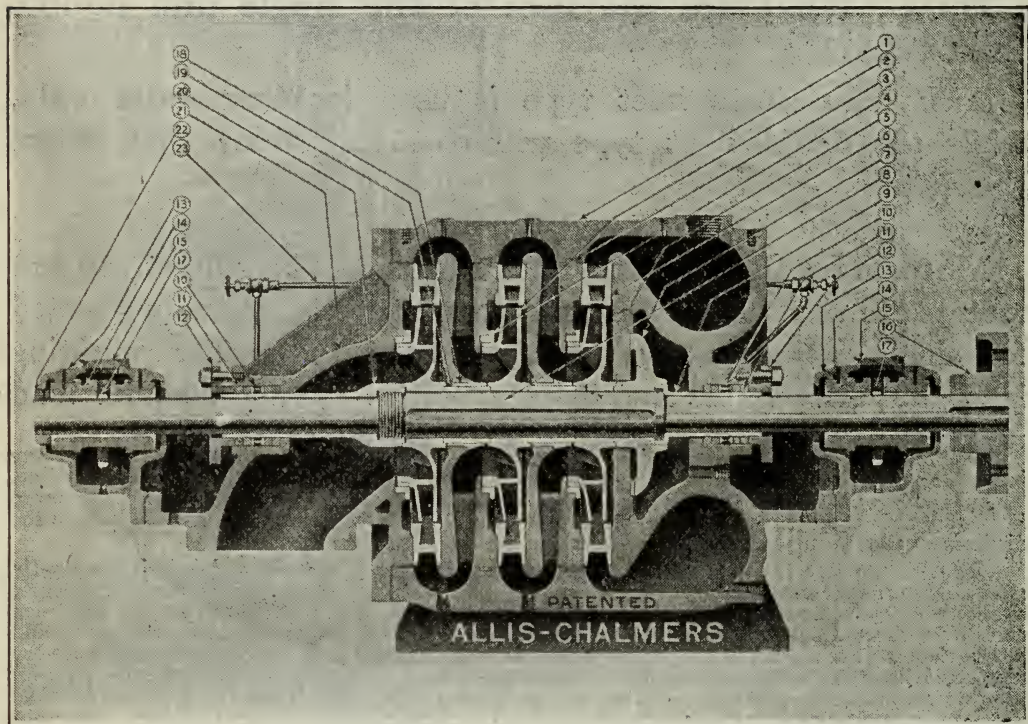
,314.—Sectional view of Allis-Chalmers three stage centrifugal pump showing construction. *The parts are:* 1, cast iron casing; 2, bronze enclosed runner; 3, cast iron return guide; 4, bronze wearing ring; 5, cast iron thrust plate; 6, bronze diffusers; 7, balancing disc; 8, open hearth steel shaft; 9, bronze shaft sleeve; 10, bronze water seal ring; 11, packing; 12, cast iron glands; 13, cast iron bearing cap; 14, cast iron babbitted shell; 15, cast iron hinged lid; 16, cast iron flexible coupling; 17, bronze oiling ring; 18, bronze return guide bushing; 19, bronze spacer sleeve; 20, bronze shaft sleeve; 21, cast iron suction cover; 22, cast iron set collar; 23, water seal piping.
